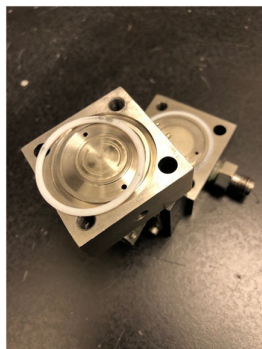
Close-up of Teflon o-rings inside the pressure transducer. This is an example of o-rings that are ready to be changed.
